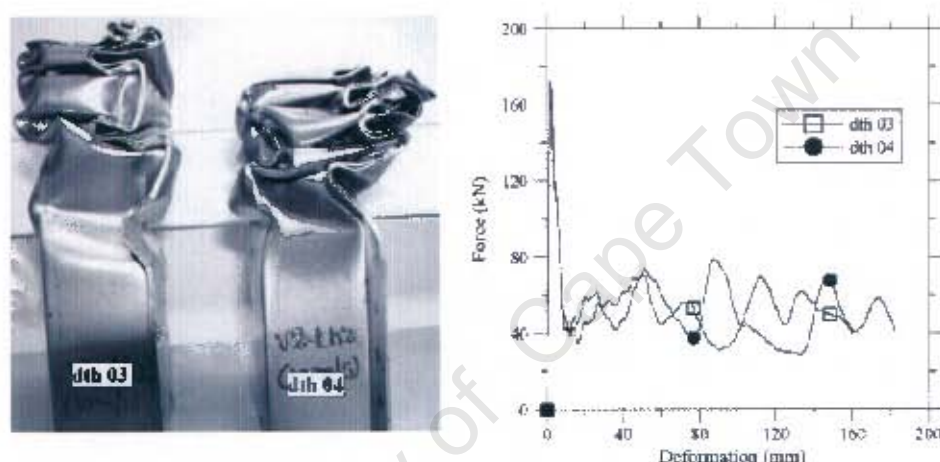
Collapse profiles and load – deformation history of a spot-welded top-hat sections after impact testing at 10m/s[79]
